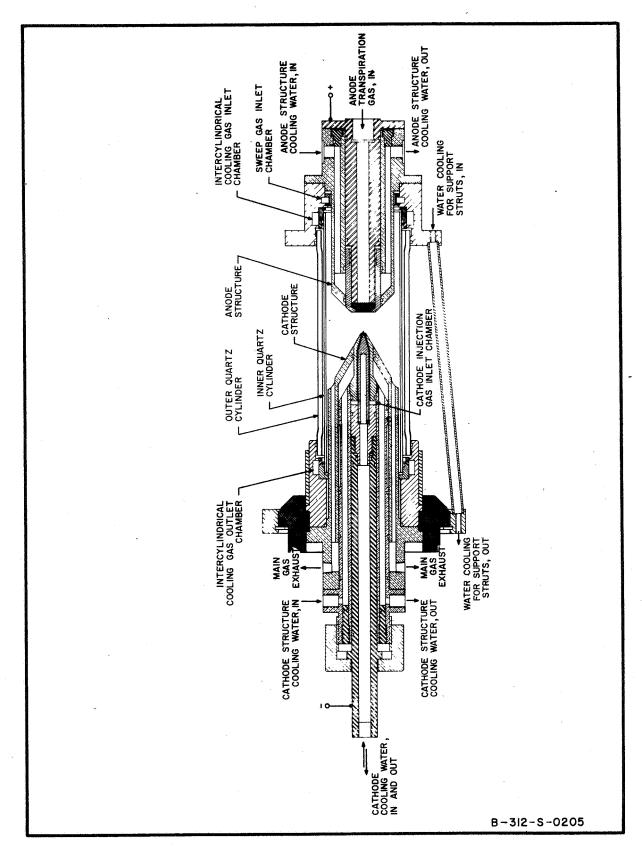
ASSEMBLY SKETCH OF MODIFIED OPPOSED GEOMETRY
